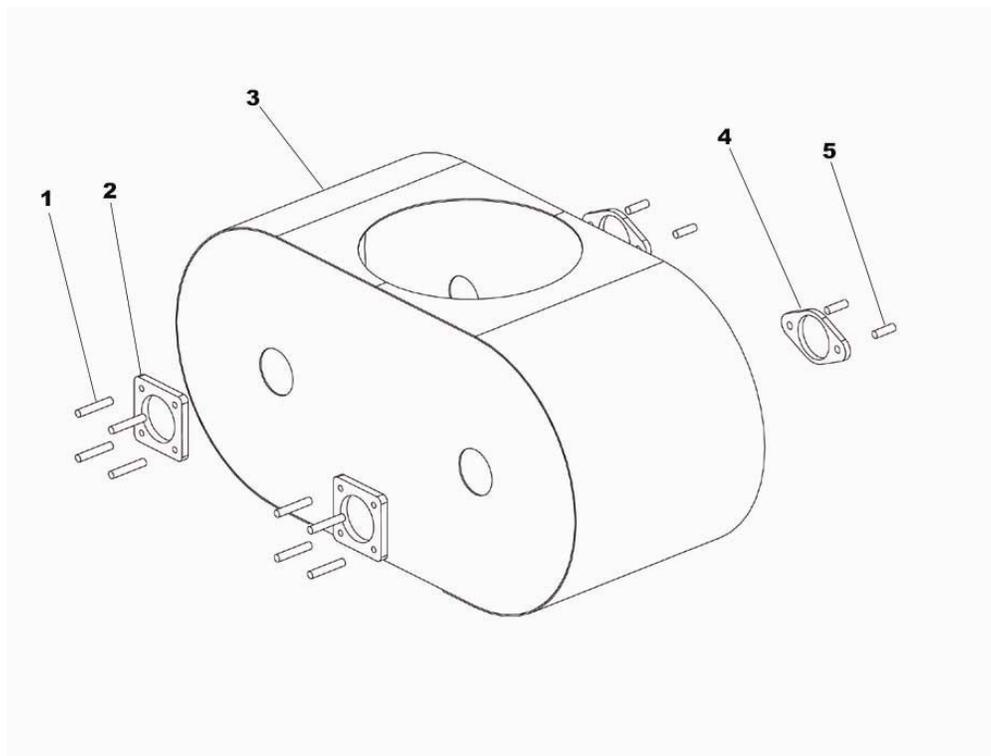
Housing assembly: 1) arm mounting ring & 2) cutter housing
